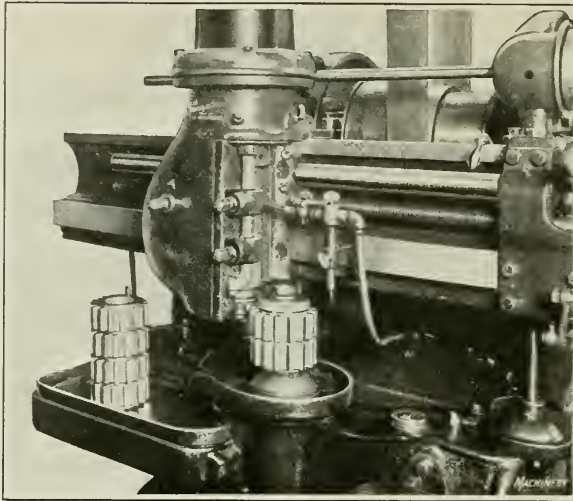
Gear Shaper which generates the Teeth as the Reciprocating Cutter and Work slowly rotate like Two Gears in Mesh
